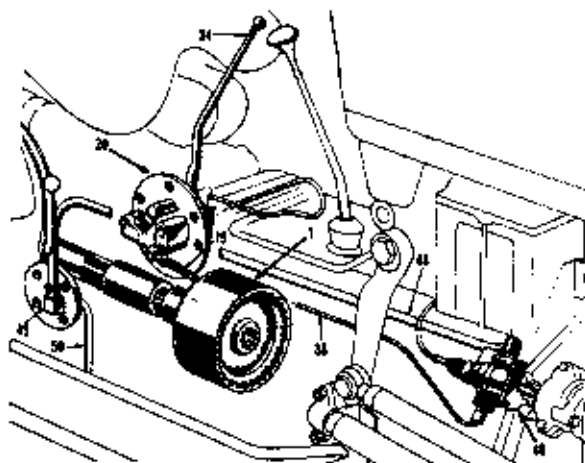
Phantom view of the live power take-off clutch installation. Clutch unit (1) mounts in drive line between transmission and final drive. Clutch pump (40) draws oil from hydraulic sump through pick-up tube (50) and suction line (48). Oil from pump travels through pressure line (38) to control valve (pto shifter) plate. Lever (34) operates control valve to regulate pressure in line (19) to clutch piston.
